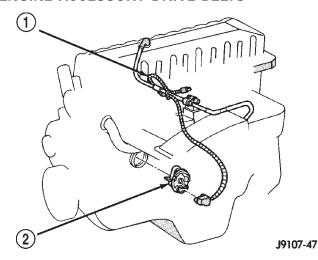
Heater and Cord—4.0L 6-Cylinder Engine
